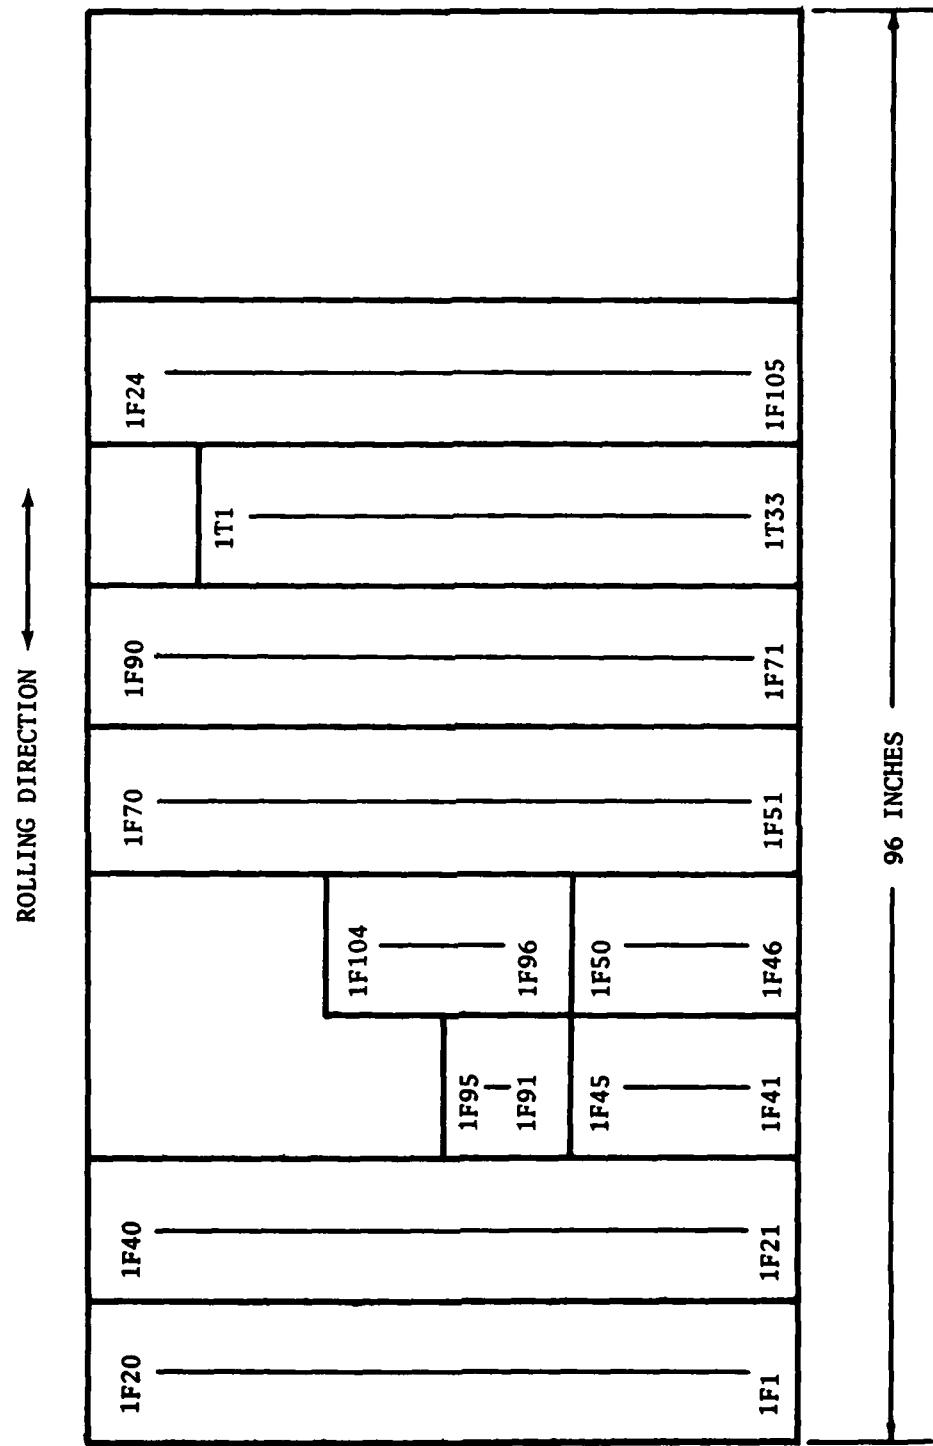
Test Coupon Layout - Phase 1 Specimens
